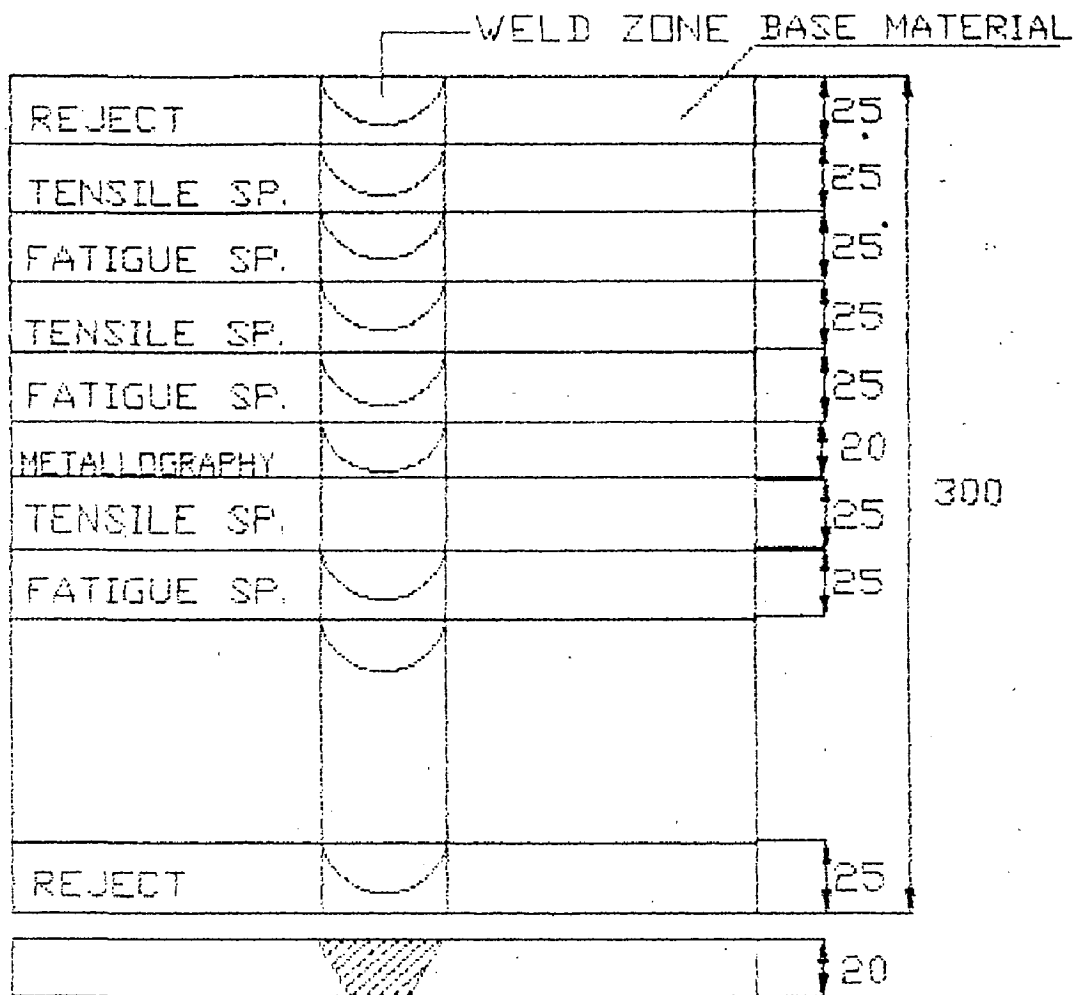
SECTIONING PLAN FOR PREPARATION OF SAMPLES
